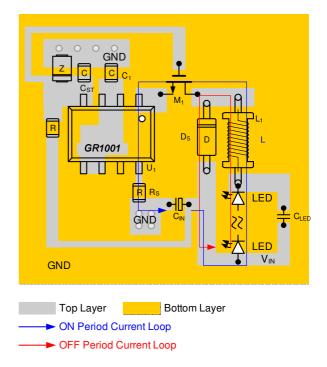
The PCB layout sketch map shown the layout considerations and the relative locations of the key components.
